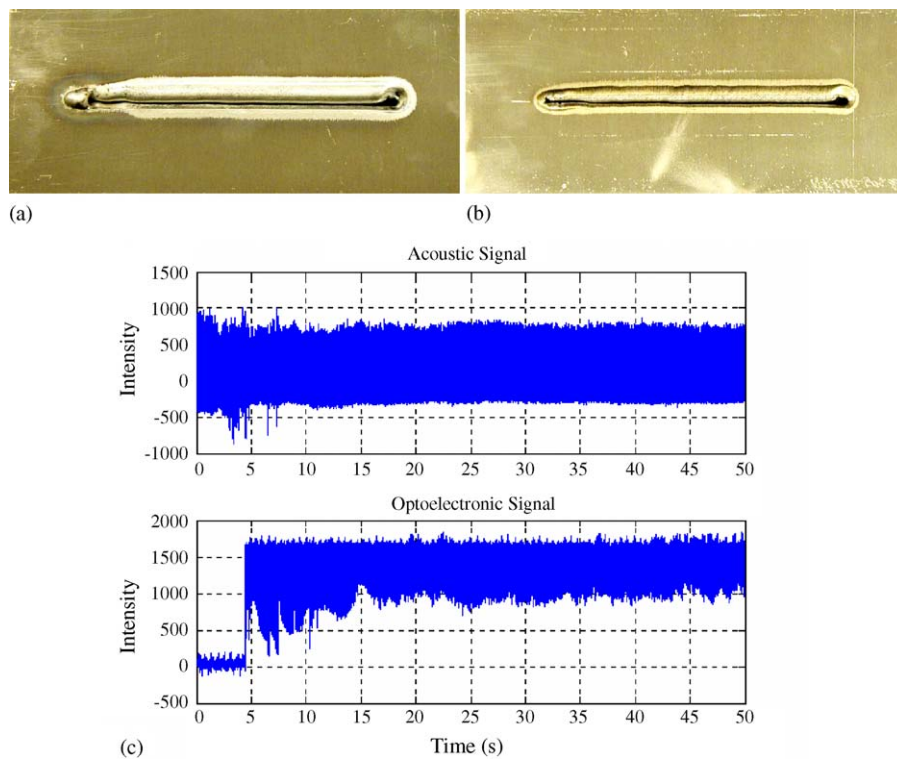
Results of Experiment II—cutting process with variable heat conduction. (a) Front-side photograph of workpiece; (b) back-side photograph of workpiece; (c) acquired signals.
